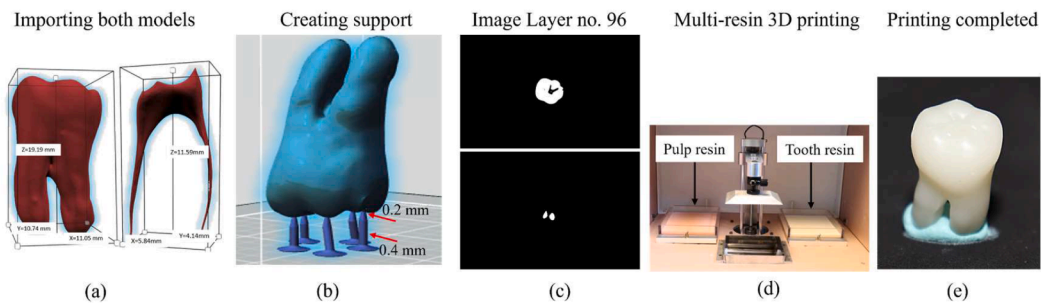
Workflow for multi-resin 3D printing of artificial teeth. (a) Importing tooth and pulp STL files, (b) creating support structures, (c) slicing process, (d) dual resin printing process, and (e) after post-processing.
